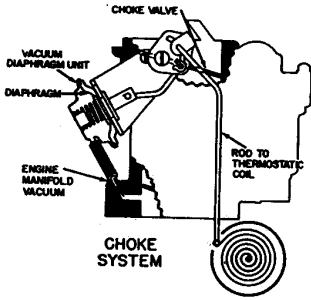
Typical automatic choke system utilizes thermostatic coil and rod connection coil to choke valve shaft. Coil tension holds choke valve closed. When heat causes coil tension to relax, choke valve opens.
